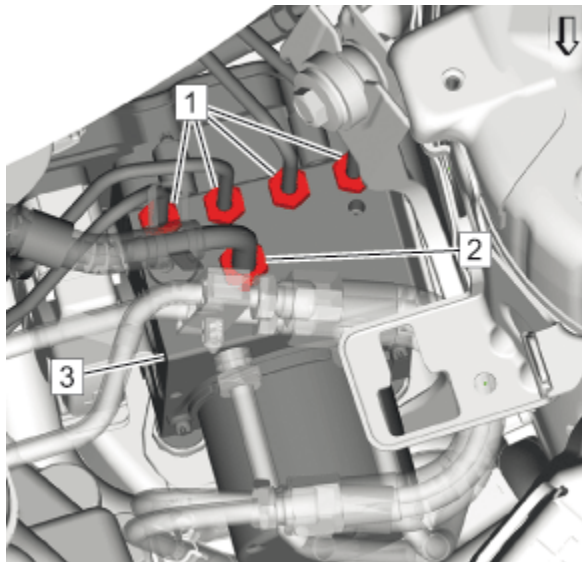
Brake Pressure Modulator Valve And Brake Pipe Fittings
